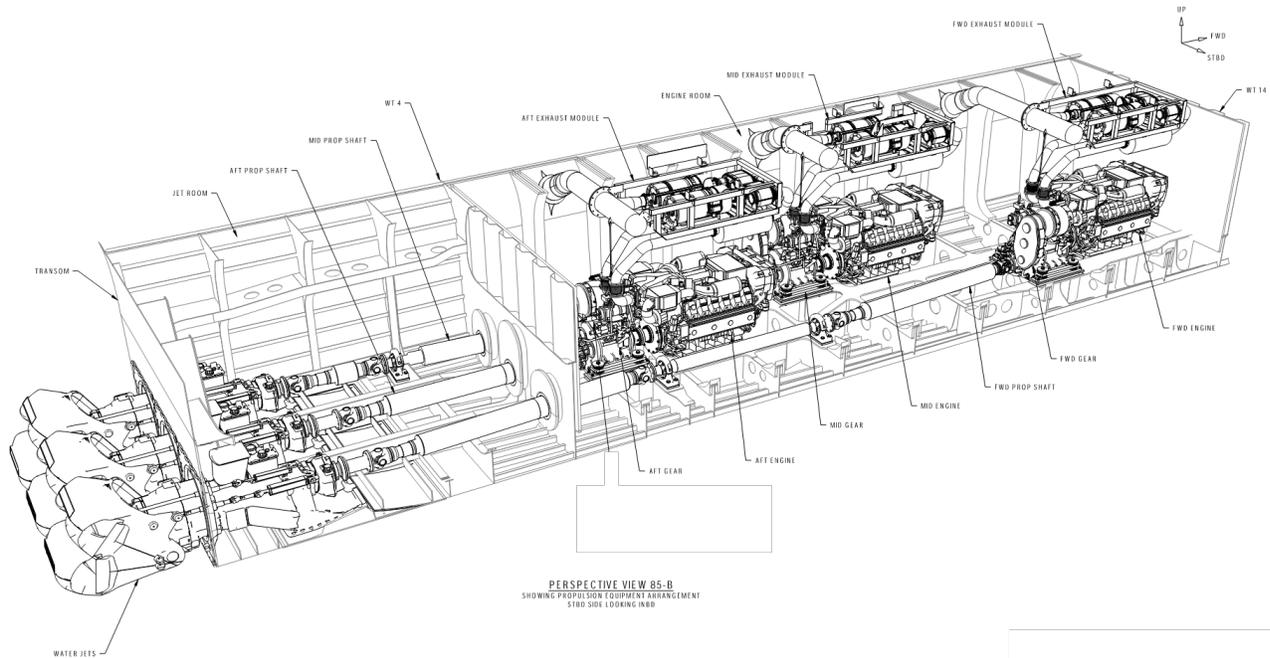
Cutaway view of the driveline arrangement in one hull, made up of 3 engines, 3 reduction gears, driveshafts, and 3 waterjets.
